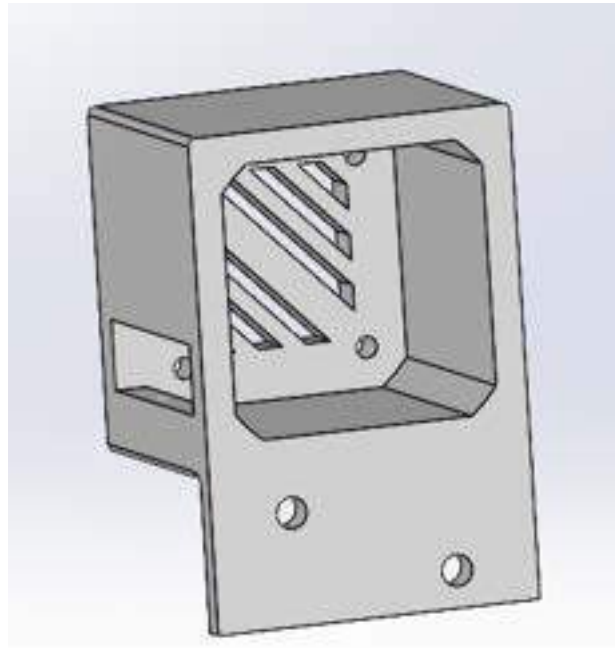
Stepper Motor Housing. The stepper motor housing will allow for the stepper motor to be screwed into the housing. Additionally, two holes on the lower extension will be used to screw this piece into the side of the angled bar in the rower frame to hold the entire structure rigidly in place. Thus, whenever the shaft rotates, the motor will not rotate with the shaft.
